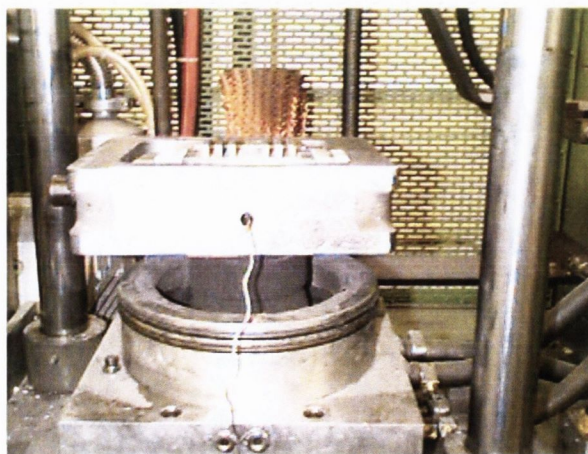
Showing close-up of the mould assembly on the lower graphite electrode with the thermocouple positioned in the aluminium bolster.
